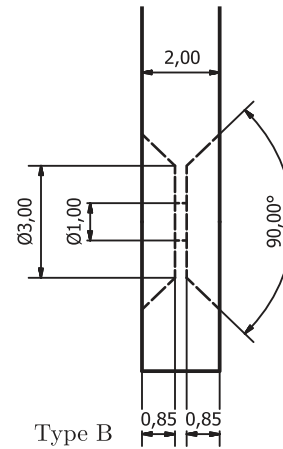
Cross section of the three-dimensional target frame design. Dimensions are given in millimeters.
